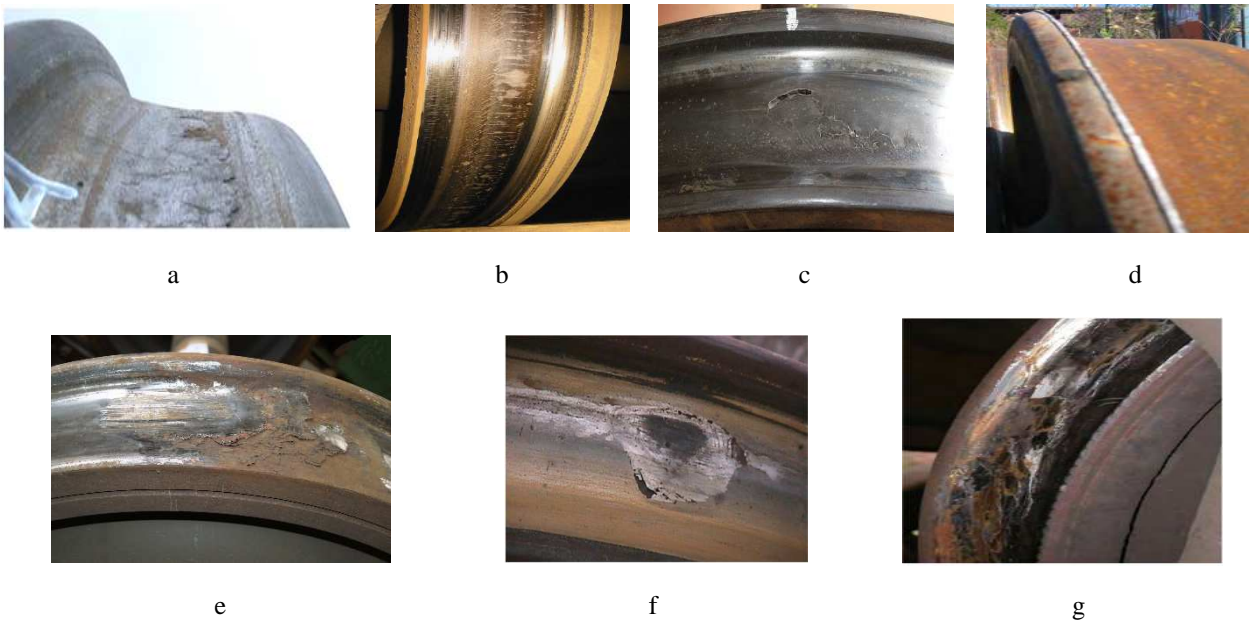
Wheel ser defects: *a* – slight hollow wear and some fatigue cracking [2]; *b* – thermal cracks [1]; *c* – shell [3]; *d* – arise [4]; *e* – spalling or shelled tread [4]; *f* – skidded wheels [4]; *g* – scaled wheel [4].
